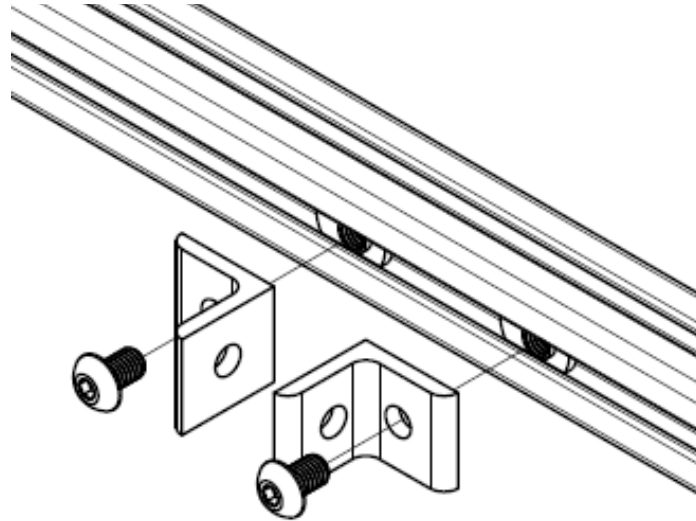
Insert the L bracket into the beam by using M5 screw and T-nut
